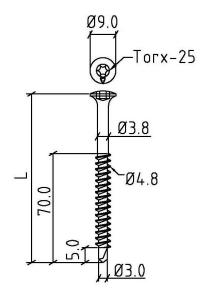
BSRF 4.8 Stainless screw for fixing in steel sheets
